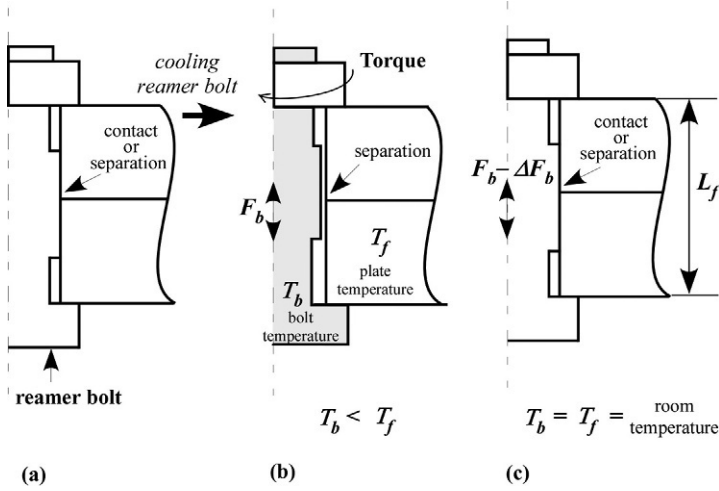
Tightening process of reamer bolt by cooled fitting. (A) Initial state, and (B) tightening by applying torque, and (C) completion of tightening operation.
